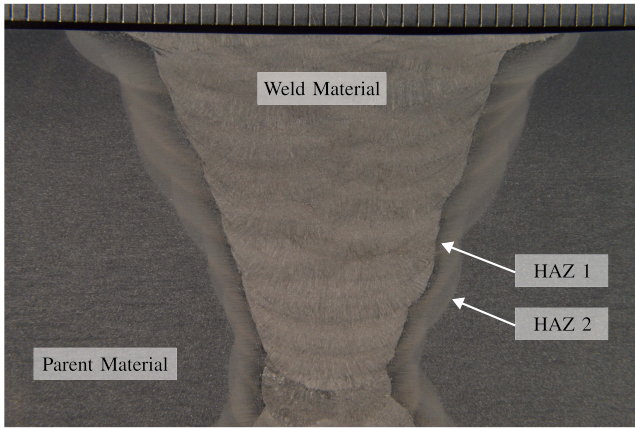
Macroscopic image of the weld sample depicting the top half of the weld, highlighted are the parent material, weld material, HAZ 1, and HAZ 2.
